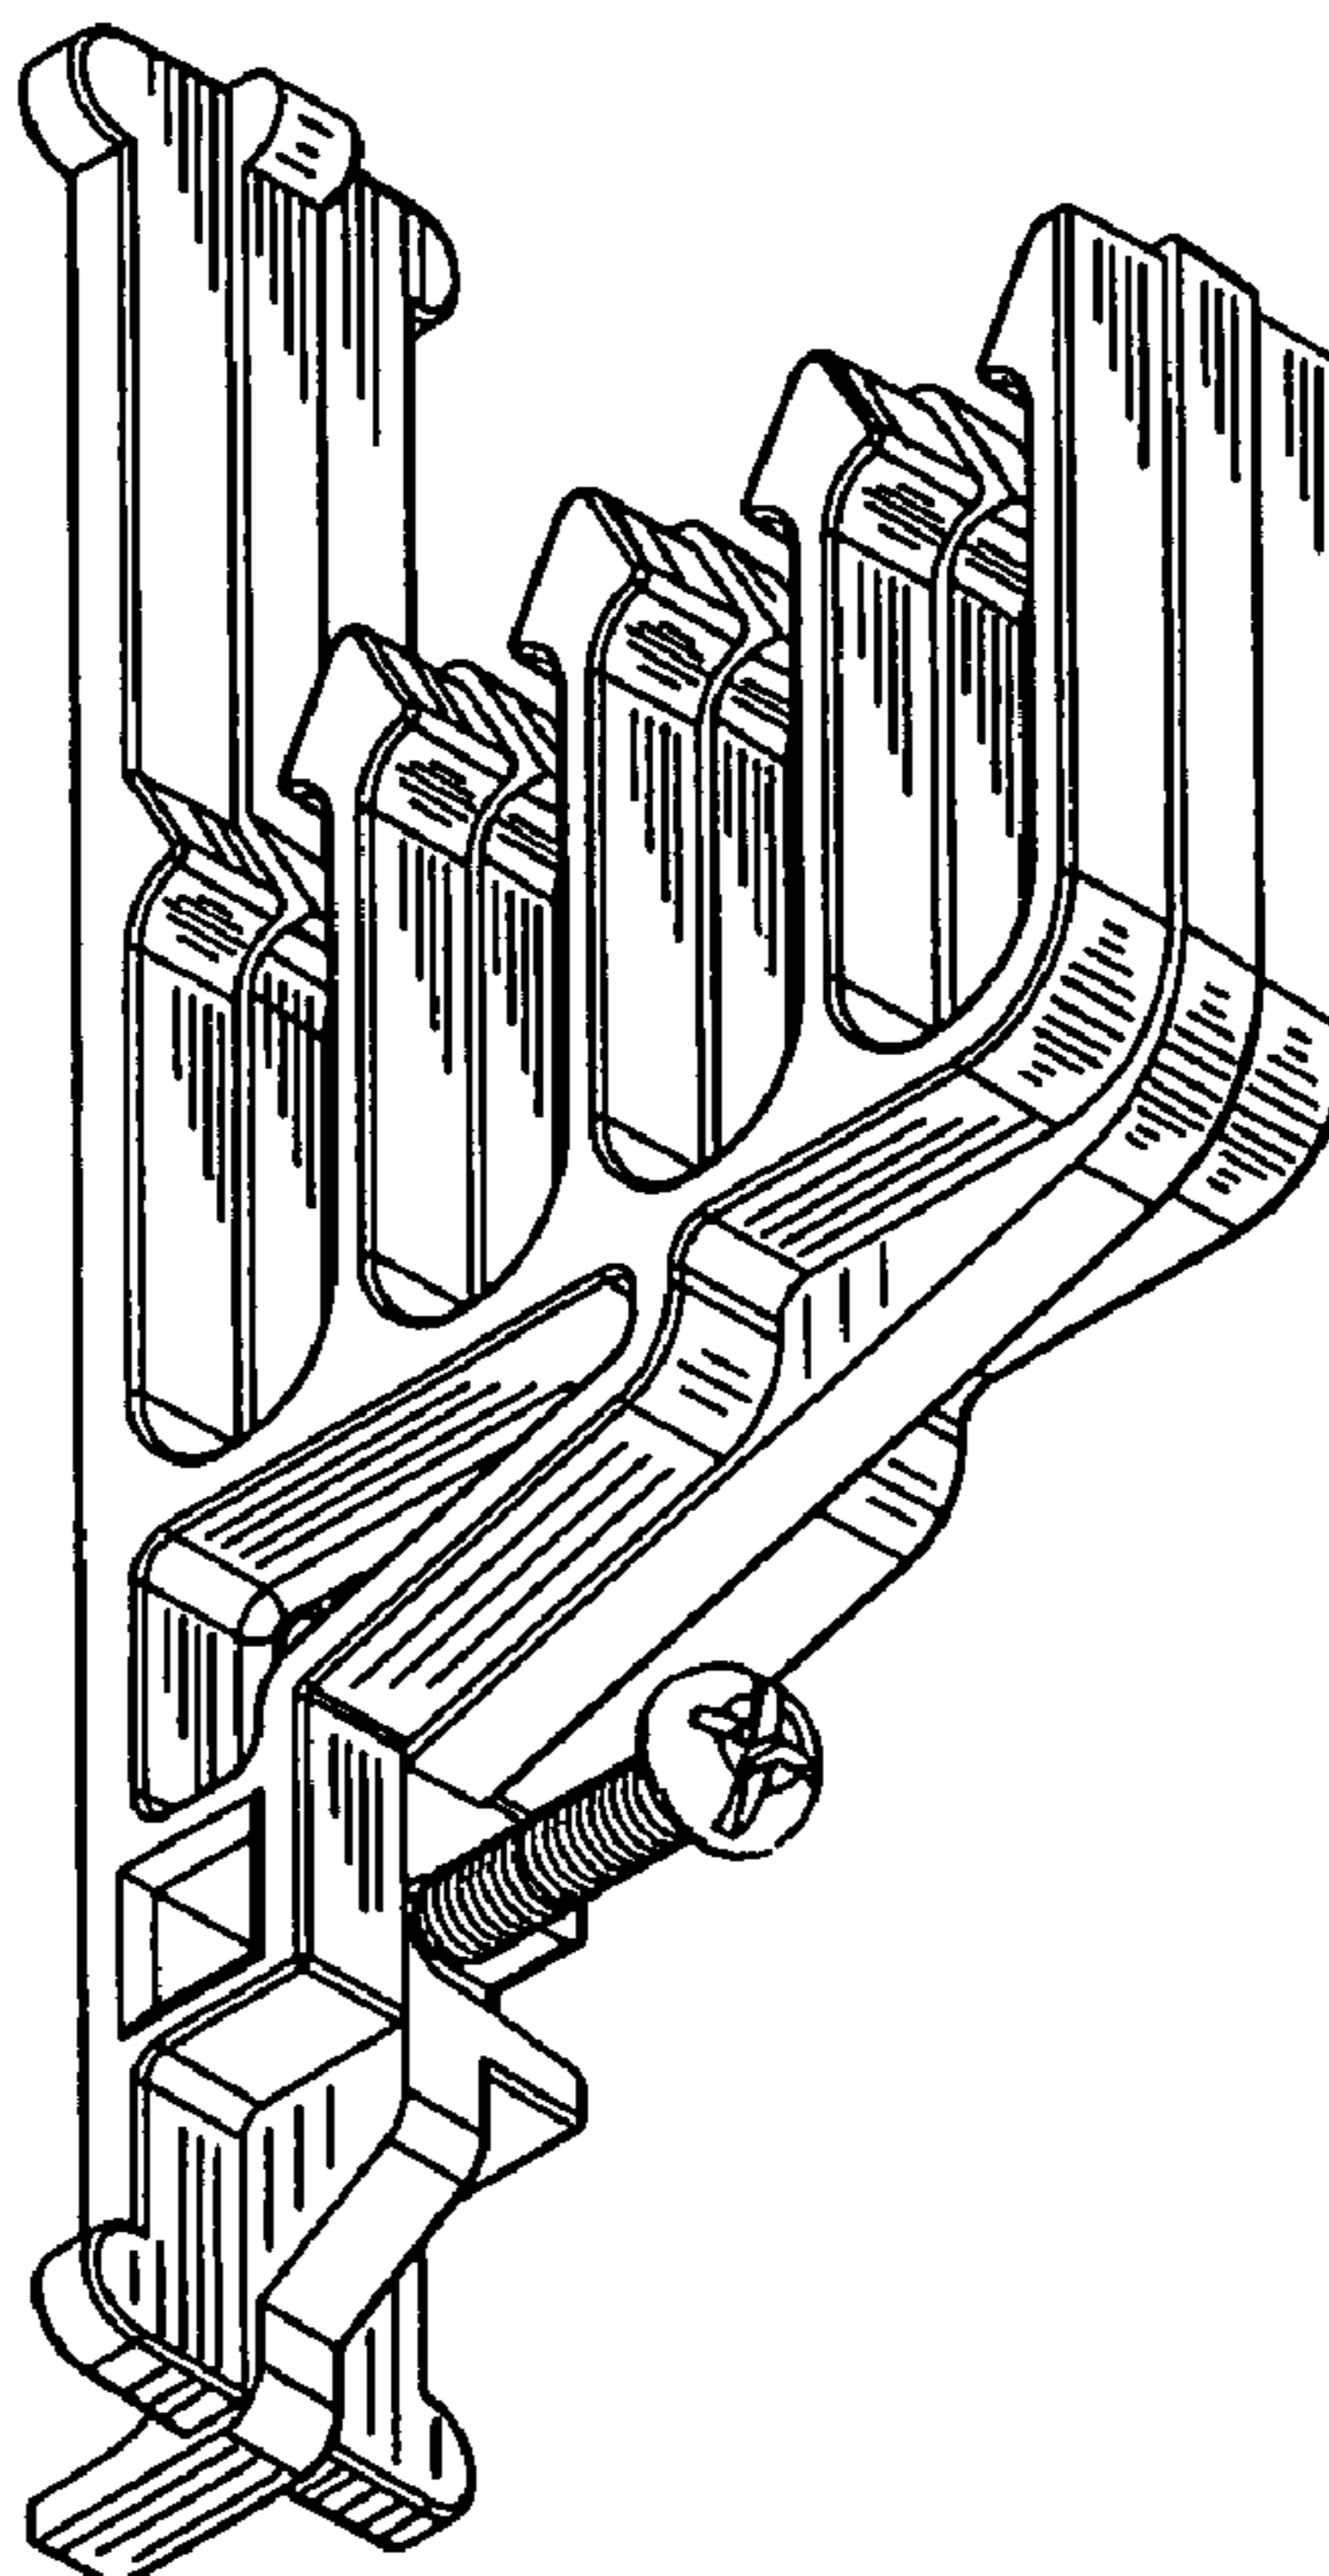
is a perspective view of a cable spacer support bracket showing my new design;
